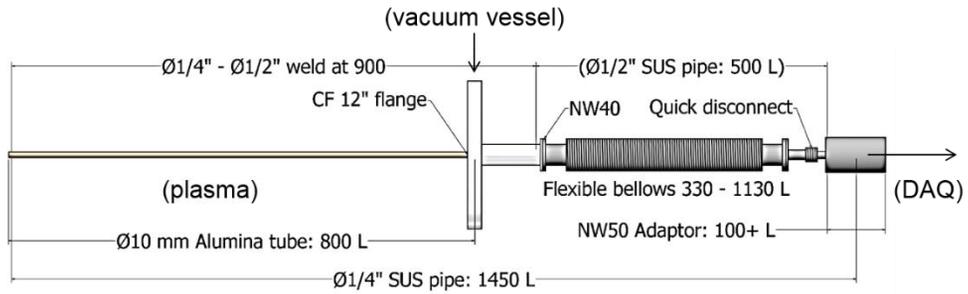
Enclosure for the internal magnetic probes: Side view. The vacuum boundary is held at the 1/4 inch stainless steel pipe (see Figure 2.13) and the quick disconnect. The 1/2 inch stainless steel pipe is used to fit the 1/4 inch pipe inside the flexible bellows. The cylindrical structure at the rear end provides the electromagnetic shield against the noise pickup. The probes can be moved between shots using the flexible bellows assisted by a linear guide (not shown).
